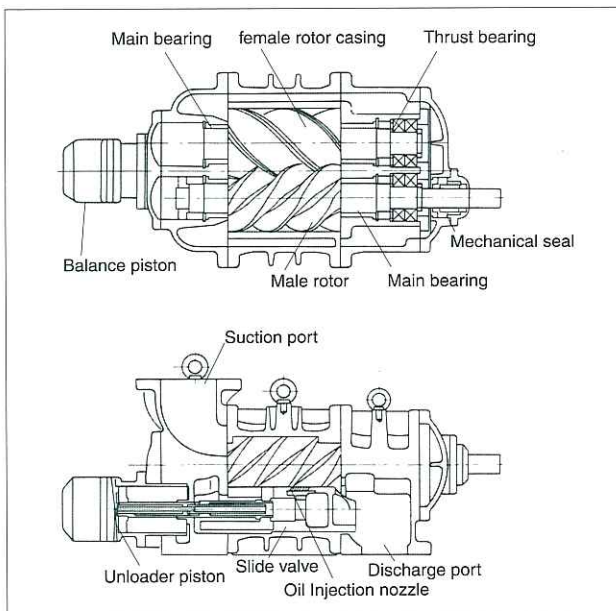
S.T.D. Screw Compressor, Cross Sectional View
